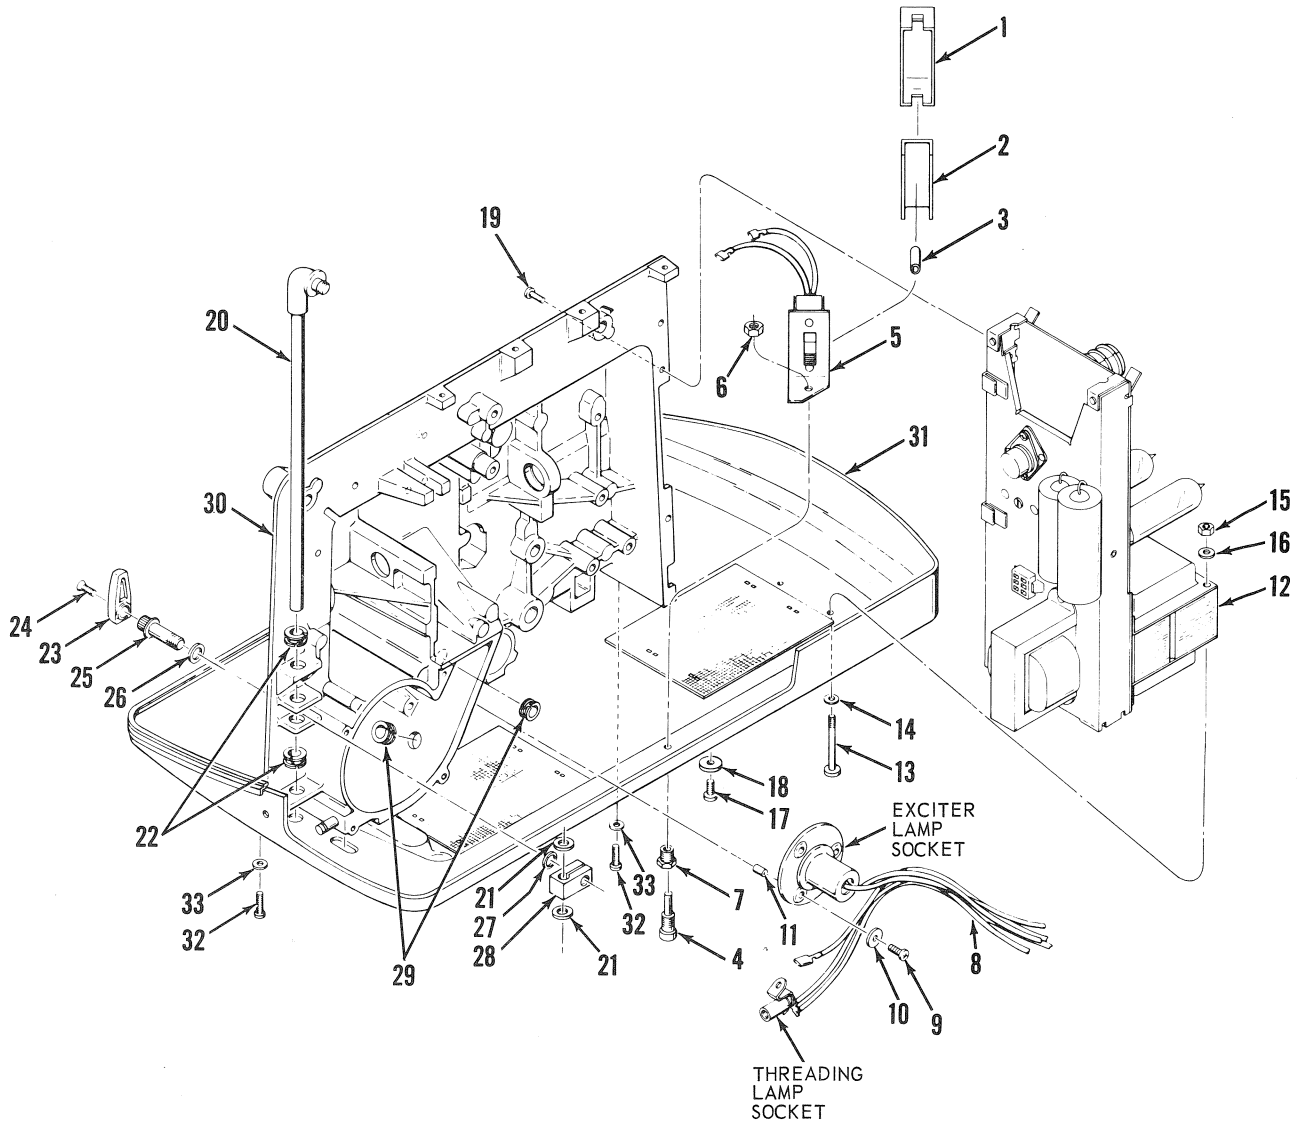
PROJECTOR ASSEMBLY (Cont.)
